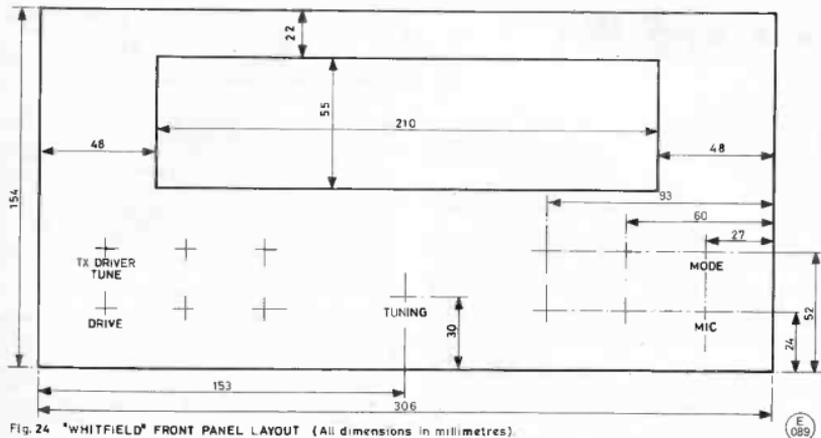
'WHITFIELD' FRONT PANEL LAYOUT (All dimensions in millimetres).
